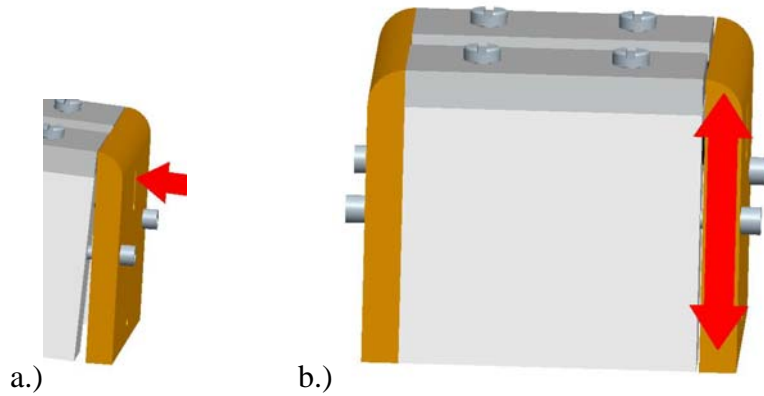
A solid model showing (a) the copper bus piece hinged at the center screw when the C-clamp is placed (b) the copper bus piece righted vertically.
